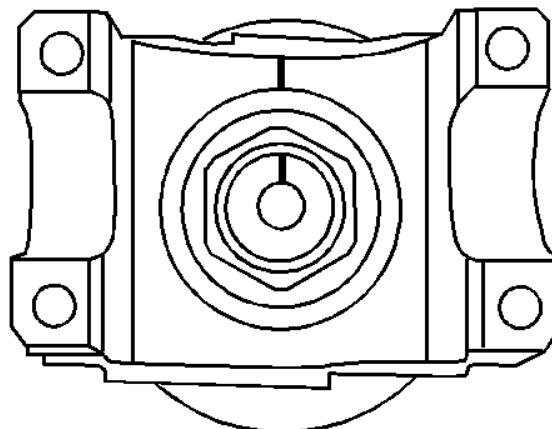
Pinion Shaft And Pinion Yoke Alignment Marks
